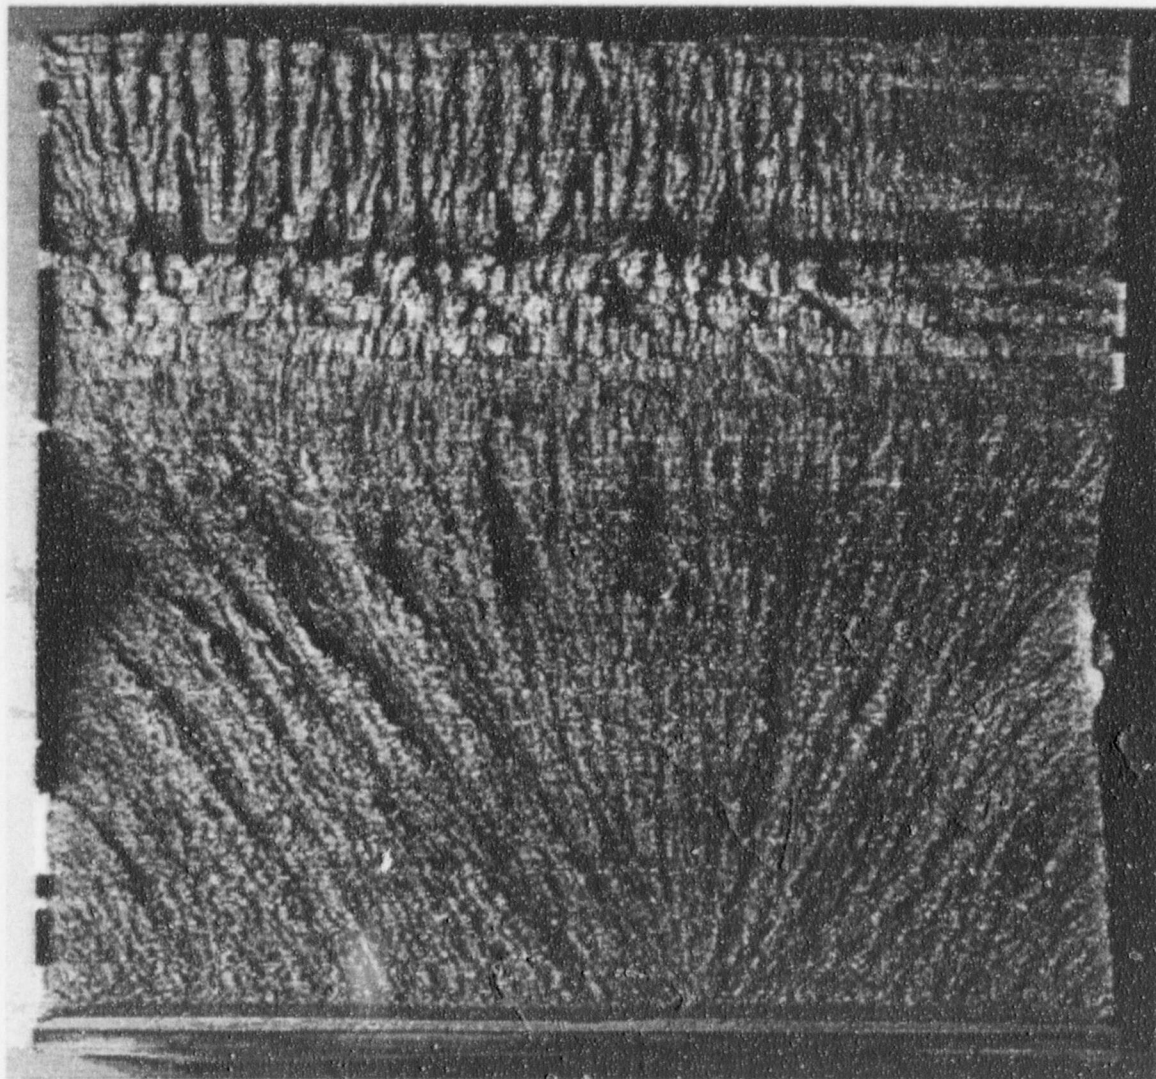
Fracture surface of full-thickness clad beam specimen CB-1.5
